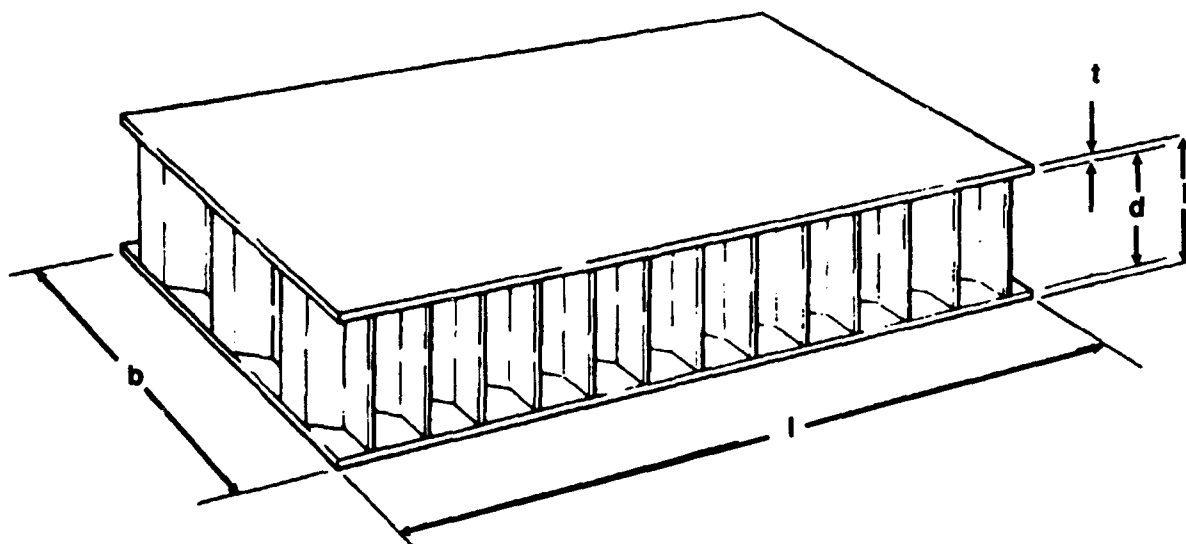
Geometry of Sandwich Beams [Hexcel, *The Basics on Bonded Sandwich Construction*]
